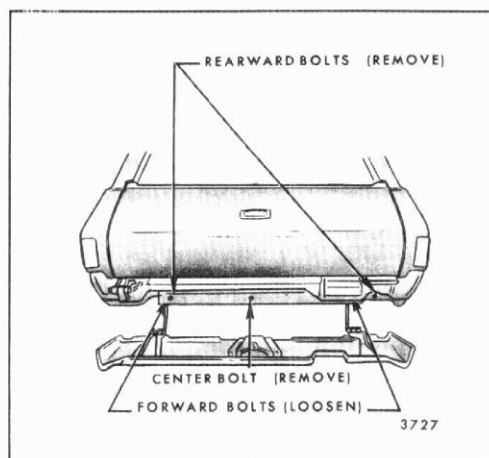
Bumper Removal-"A" Body Shown, "B" Body Similar
